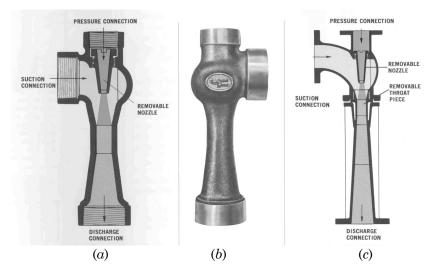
Utility ejectors: (a, b) two-piece, female fittings; (c) four-piece, flanged fittings. (Courtesy KETEMA, Schutte & Koerting Division)
